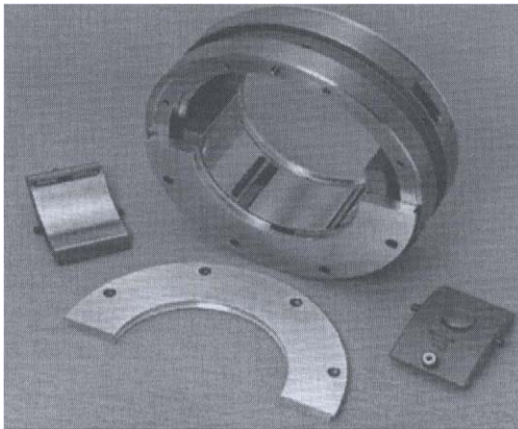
Tilting pad journal bearing assembly (Courtesy of Kingsbury, Inc.)
